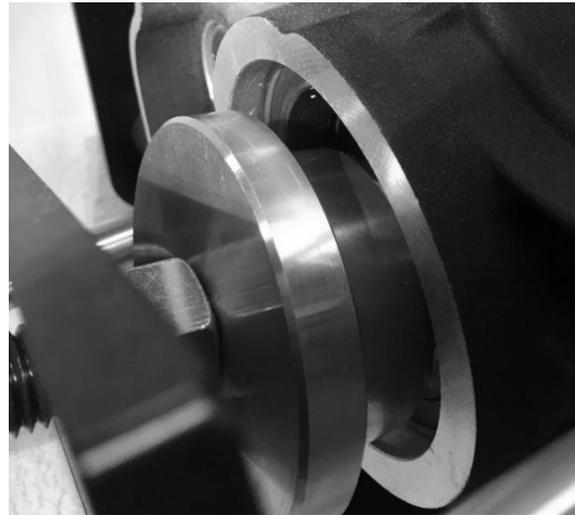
| TAPERED BEARING ADAPTER VISUAL INSPECTION
